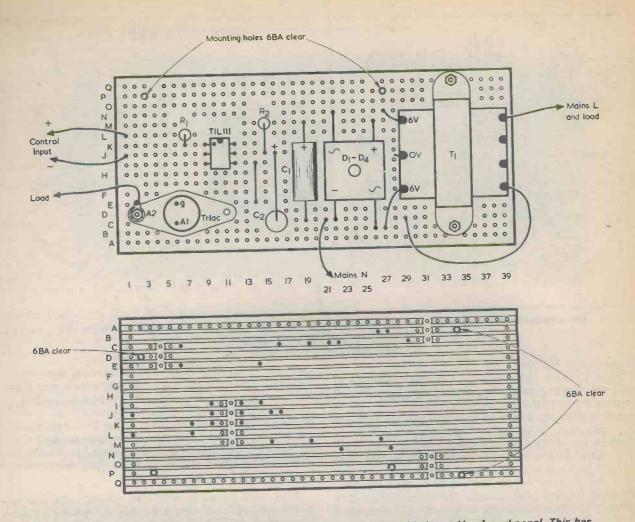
The components of the opto-isolator switch may be assembled on a Veroboard panel. This has two mounting holes to enable it to be secured to a suitable surface
